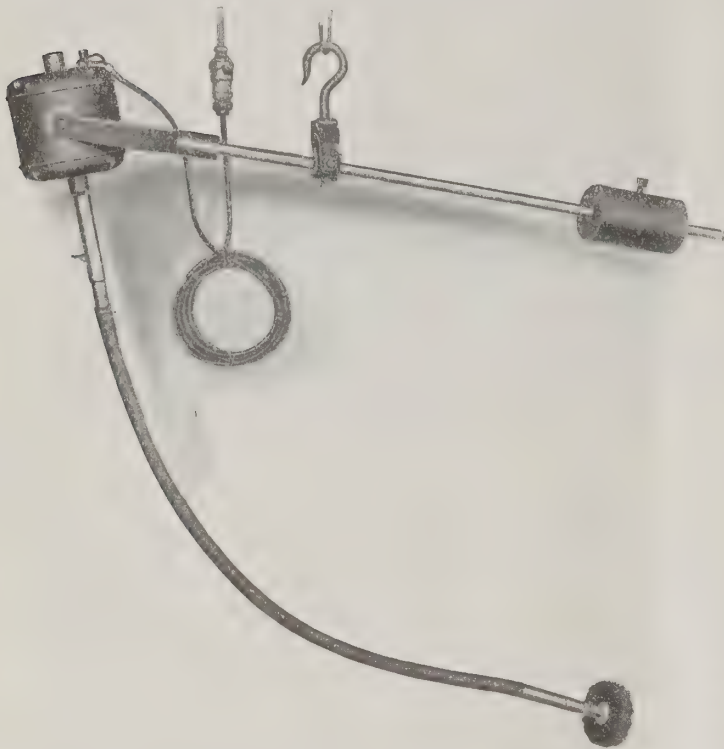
STOW SUSPENDED TYPE OF MOTOR AND FLEXIBLE SHAFT.
